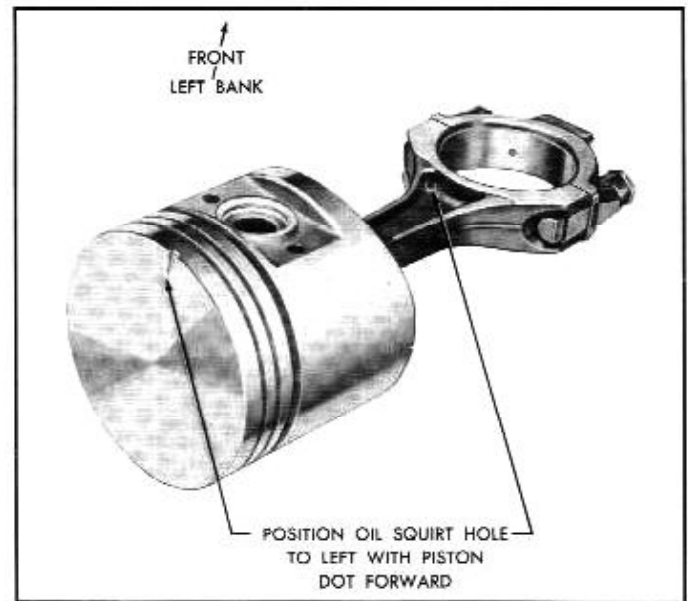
A-58—Position of Piston and Connecting Rod Squirt Hole—Left Bank
